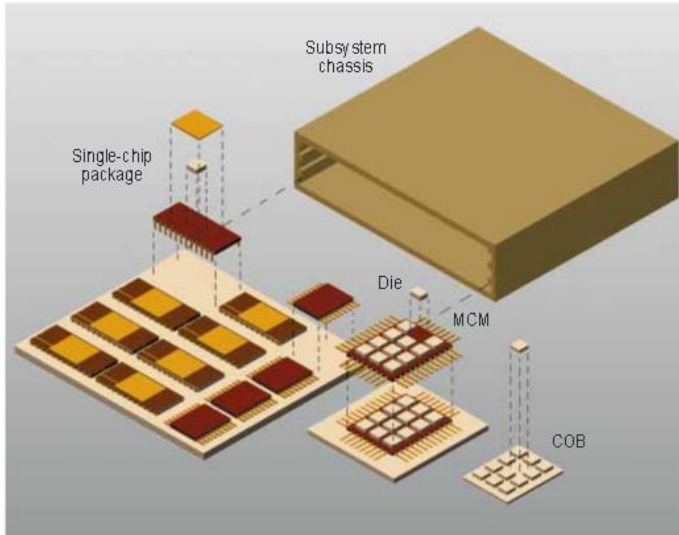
Three levels of packaging: the device is packaged into a component, the component is mounted on the board, and the board is installed into the subsystem chassis (MCM = multichip module, COB = chip-on-board)[5].
